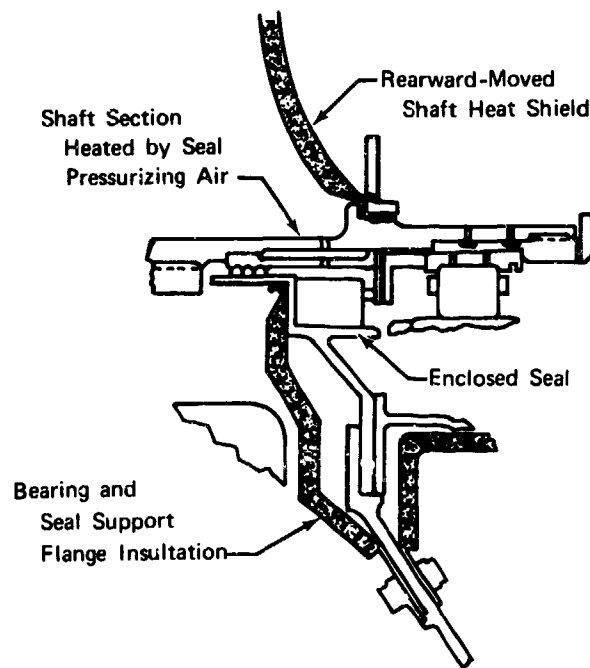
Revisions of STJ346A Rear Bearing and Seal Supports
